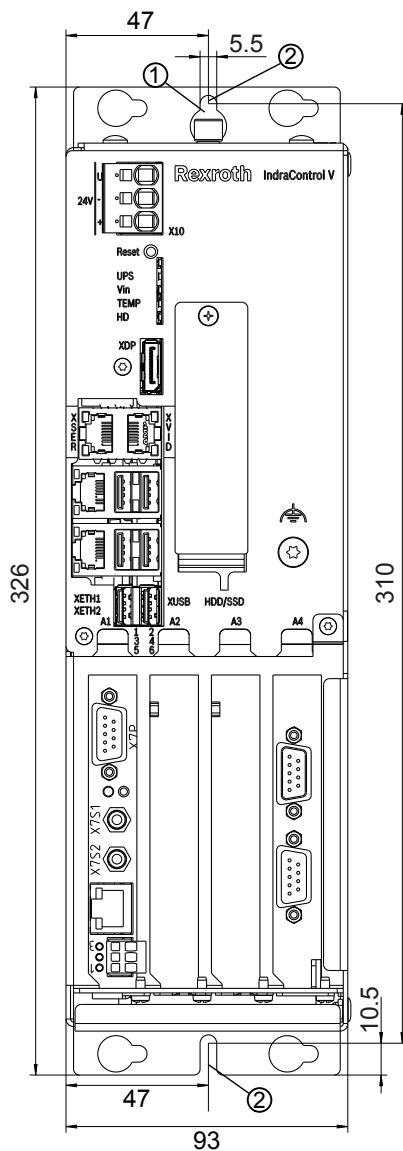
Housing dimensions for devices with two slots, vertical mounting
